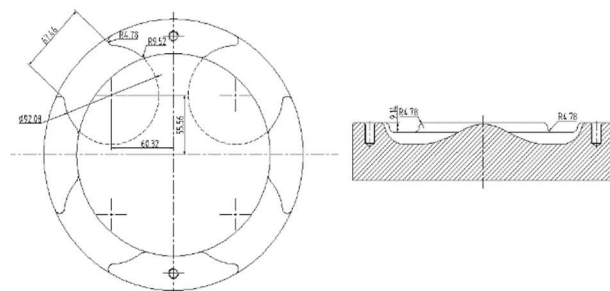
Two-dimensional drawing of a variable-angle piston valve avoidance pit
